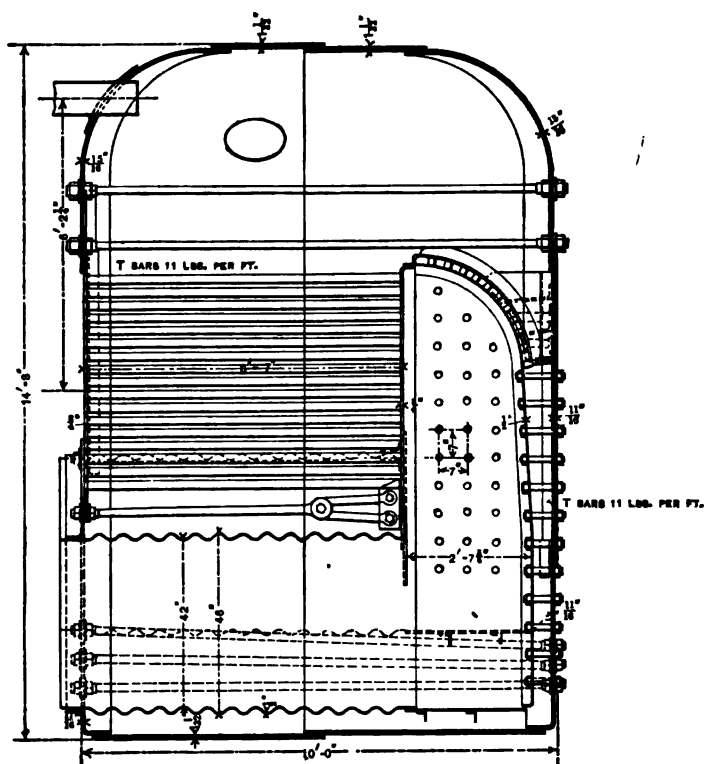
Scotch Boiler, single-ended, with separate combustion-chambers.
